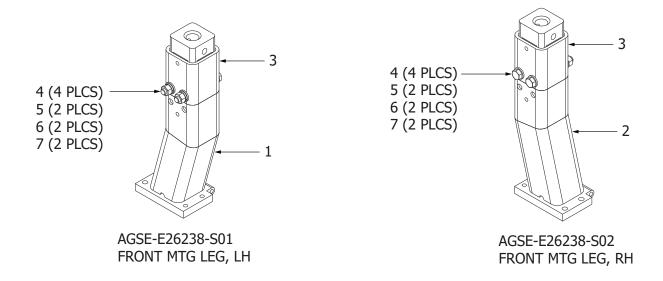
AGSE-E26238-S01/S02 Front Mounting Leg Assemblies
